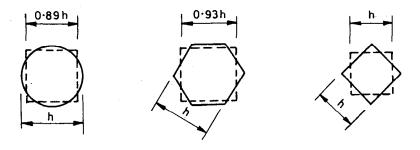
Equivalent Square Sections for Typical Cross Sections
